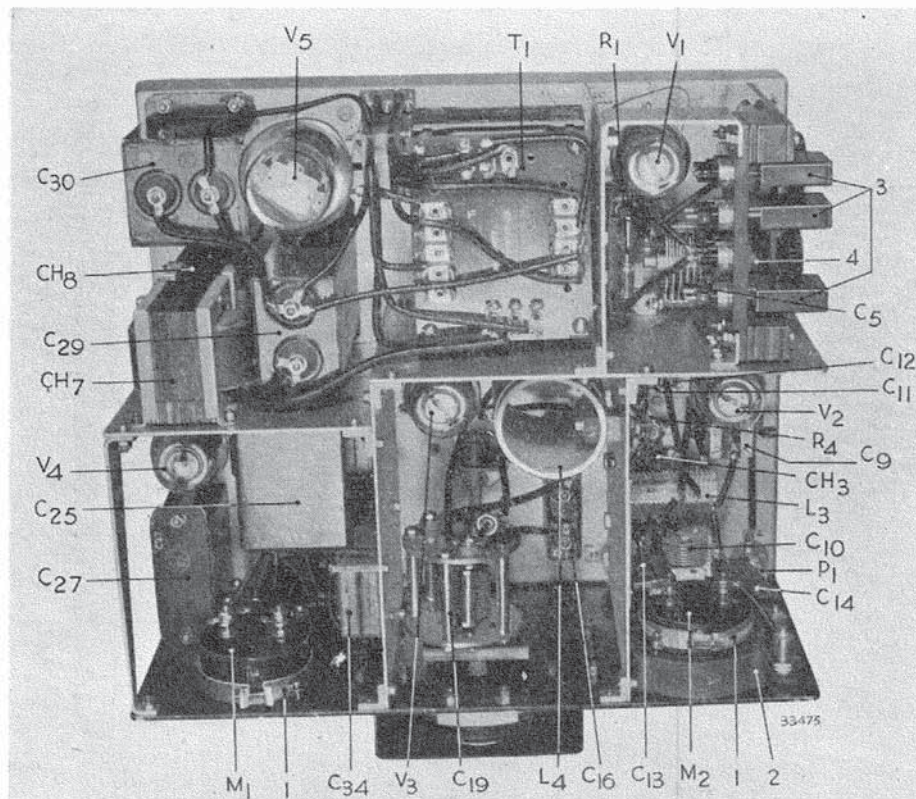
VIEW OF CHASSIS FROM ABOVE
